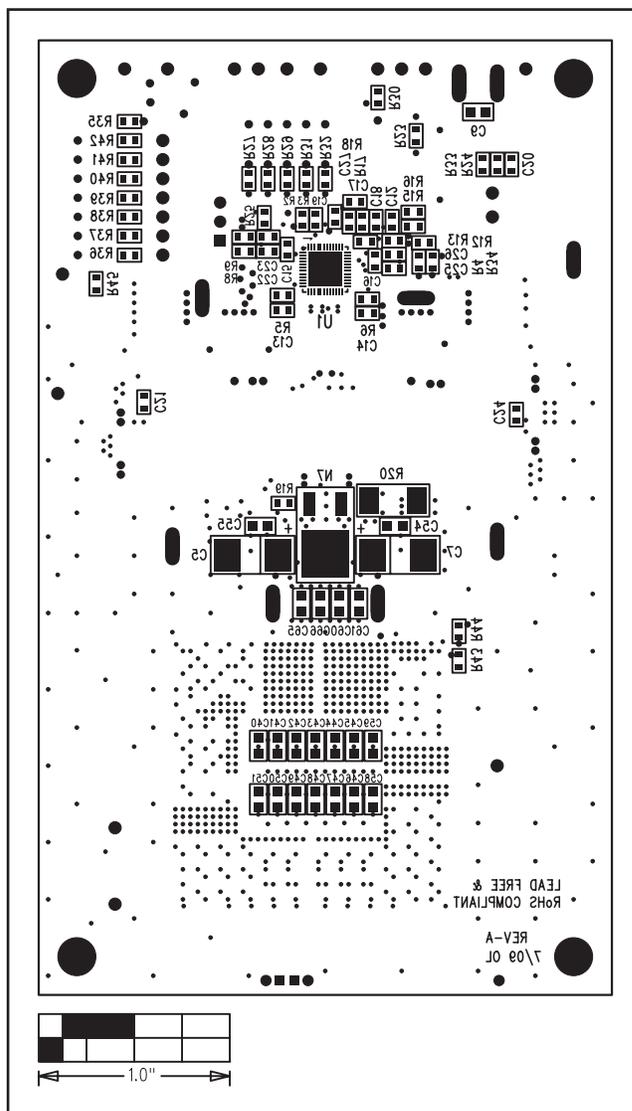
MAX17582 EV Kit Component Placement Guide—Solder Side
